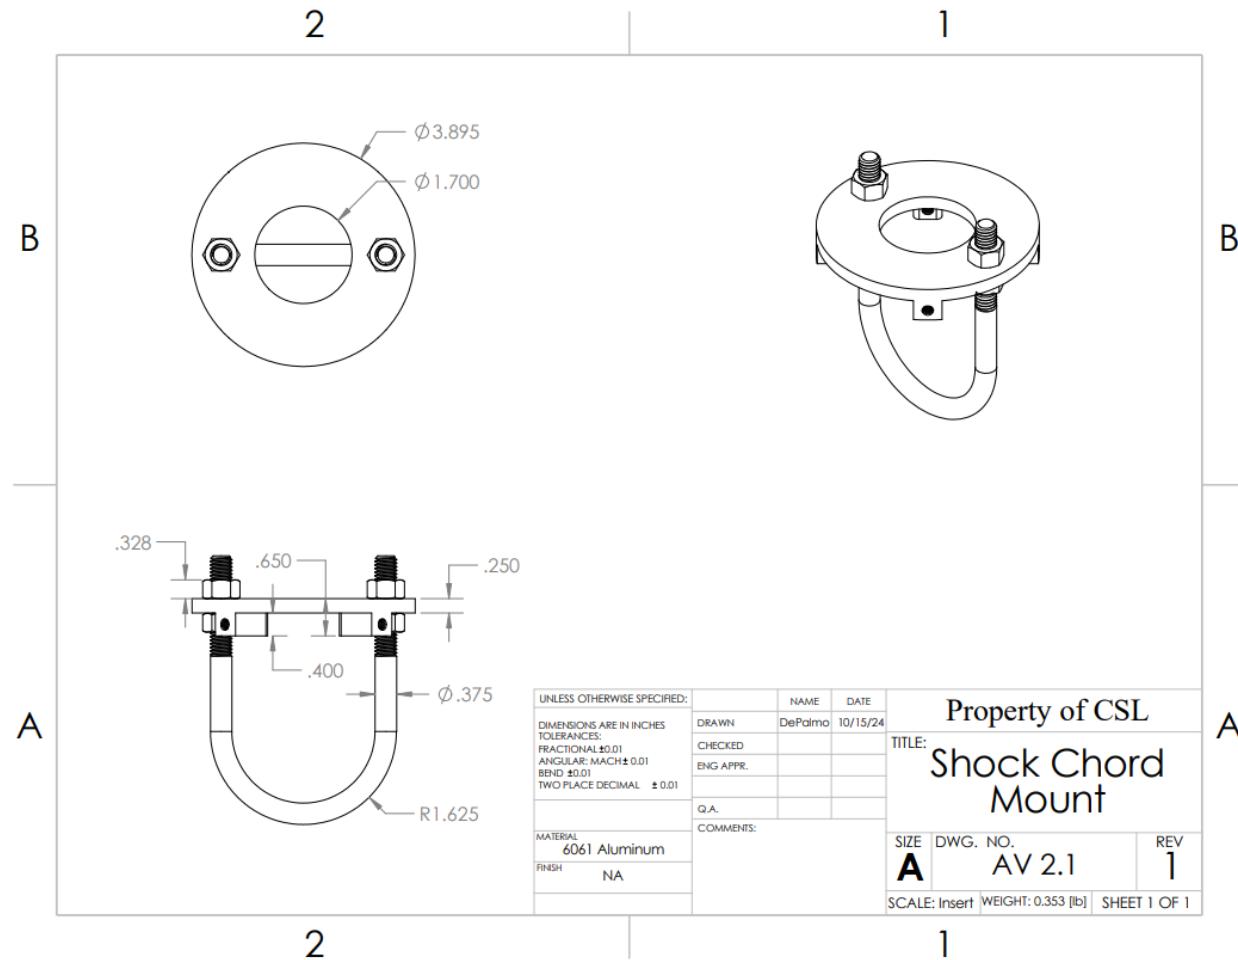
SolidWorks Drawing for Shock Chord Mount V2.
